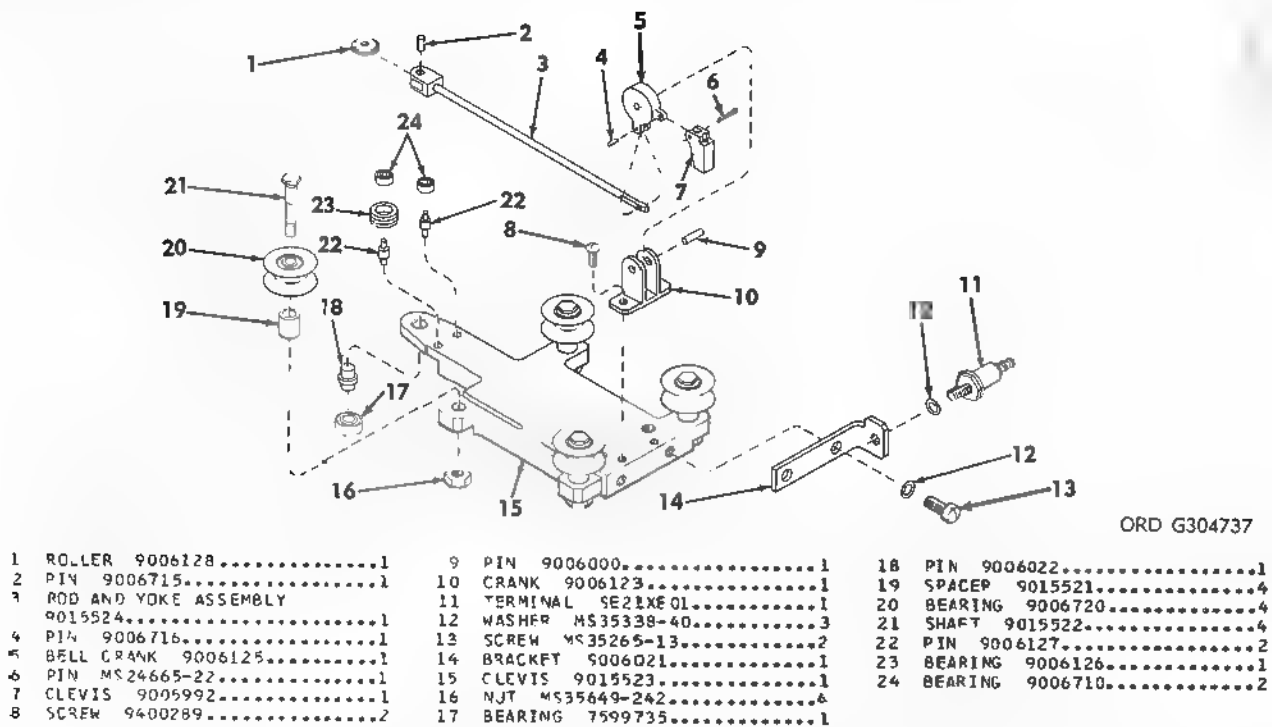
CARRIAGE ASSEMBLY /9015527/-EXPLODED VIEW
